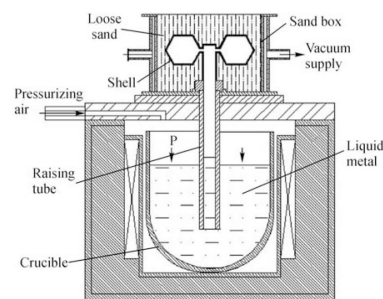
Schematic of the expendable shell casting process under vacuum and low pressure
